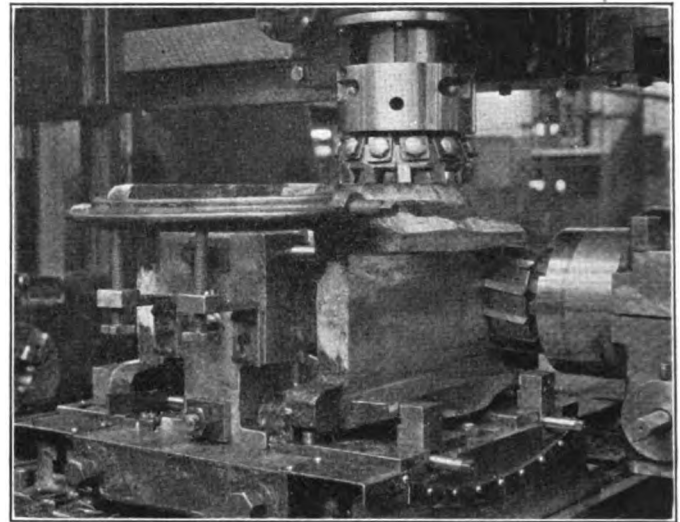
Special fixture for holding driving boxes while milling three sides simultaneously
